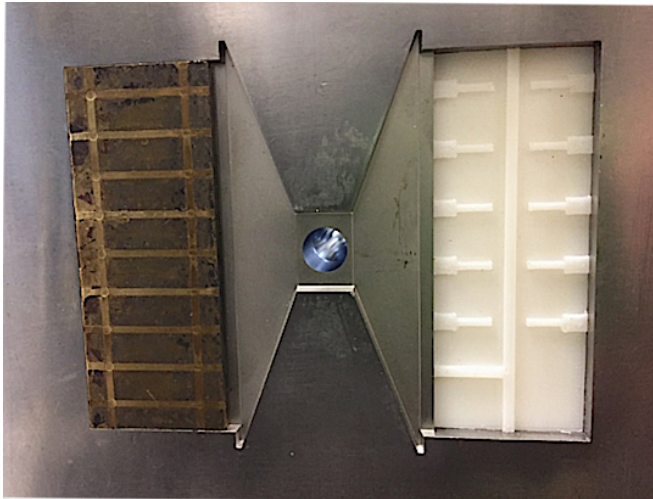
3D printed mould insert (ABS) installed into the injection moulding machine for performing the CIM process.
